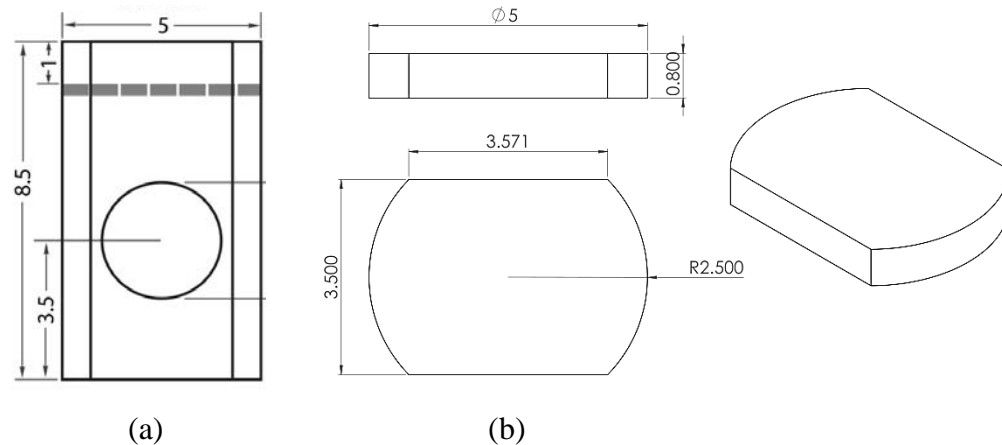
Schematic showing a) tensile bar head dimensions and location of the cut (gray dashed line), and b) bend test sample dimensions.
